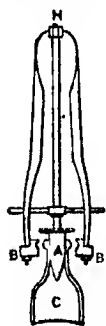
Tool for moulding the inside and outside of the neck of a bottle.
